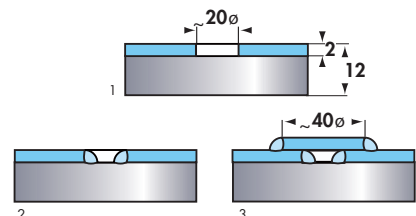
Manual or fully mechanized GTA capped plug welding (Plug welds).
